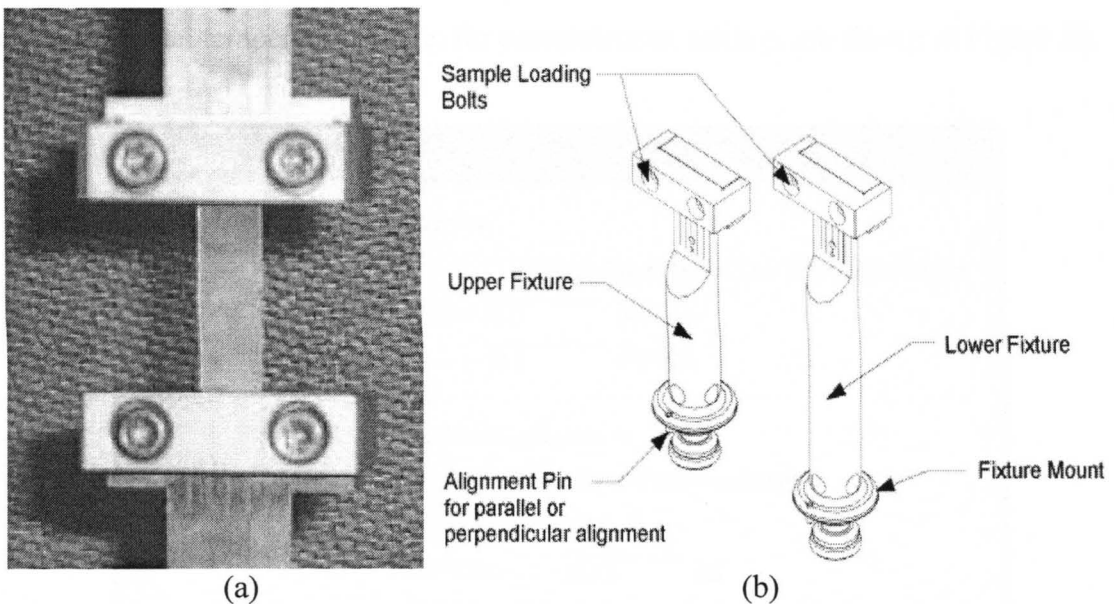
Specimen was mounted in the film/fiber tension clamps. (a) PPS specimen between top/bottom clamps; (b) Film and fiber tool component
